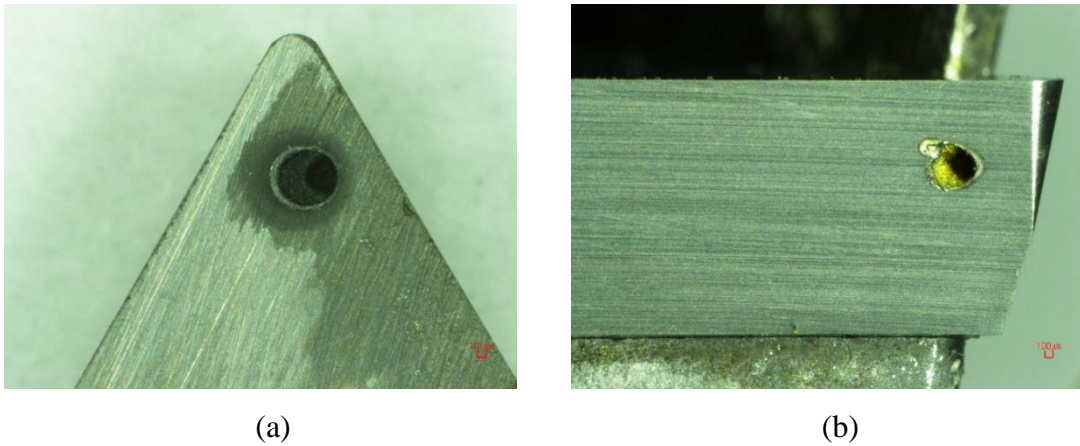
Holes drilled on (a) Rake and (b) Flank faces for turning tests.
